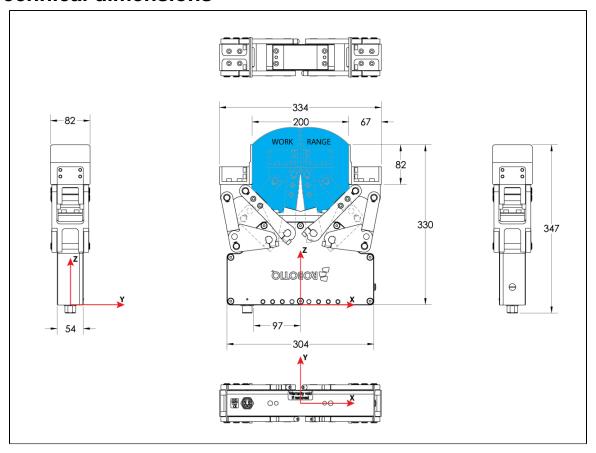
Robotiq 2-Finger Adaptive Robot Gripper – 200 technical dimensions in open position.
